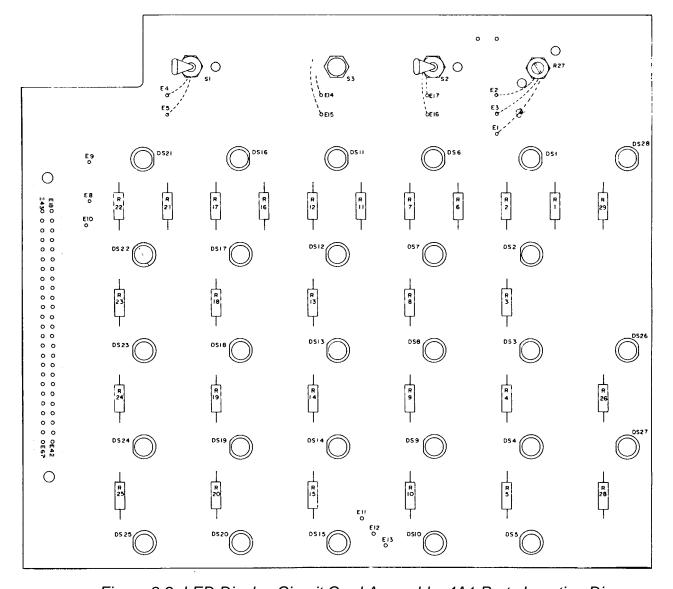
LED Display Circuit Card Assembly, 4A1 Parts Location Diagram
